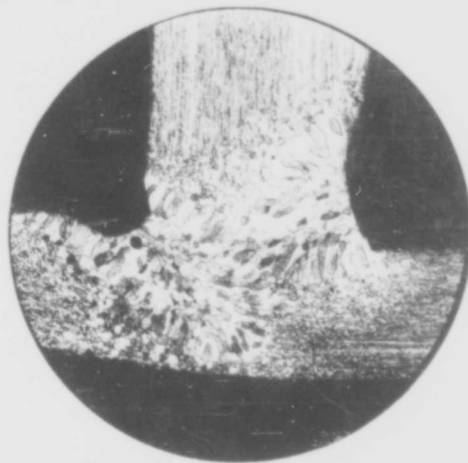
Photomicrograph of Electron Beam Welded T-Joint of TZM Molybdenum Showing Recrystallization in weld Zone (75X)
